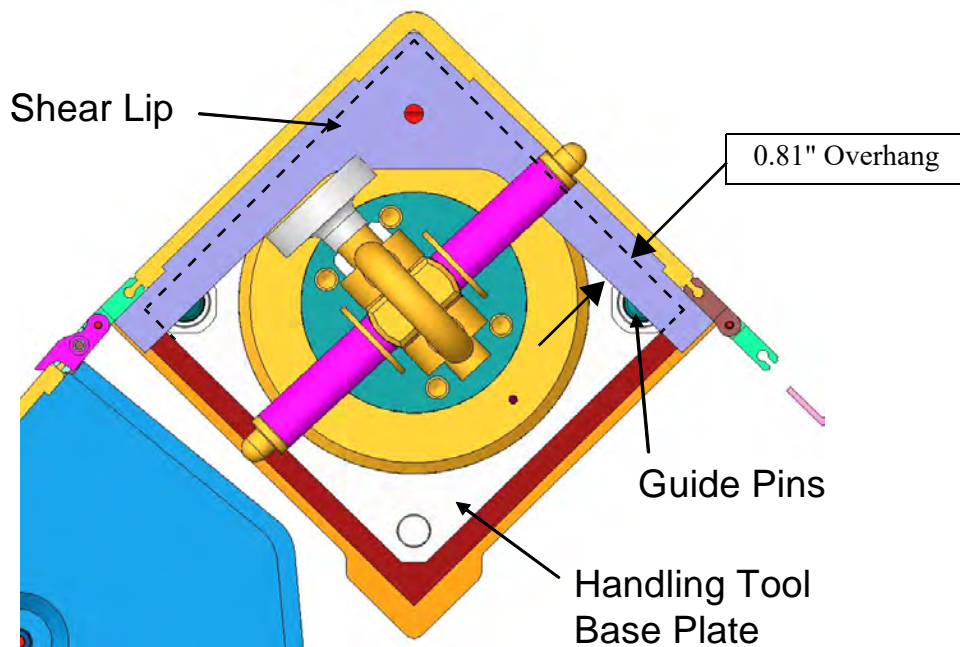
Fuel Handling Tool Shown Attached to a 17x17 XL Fuel Assembly and Behind the Overhanging Shear Lip
